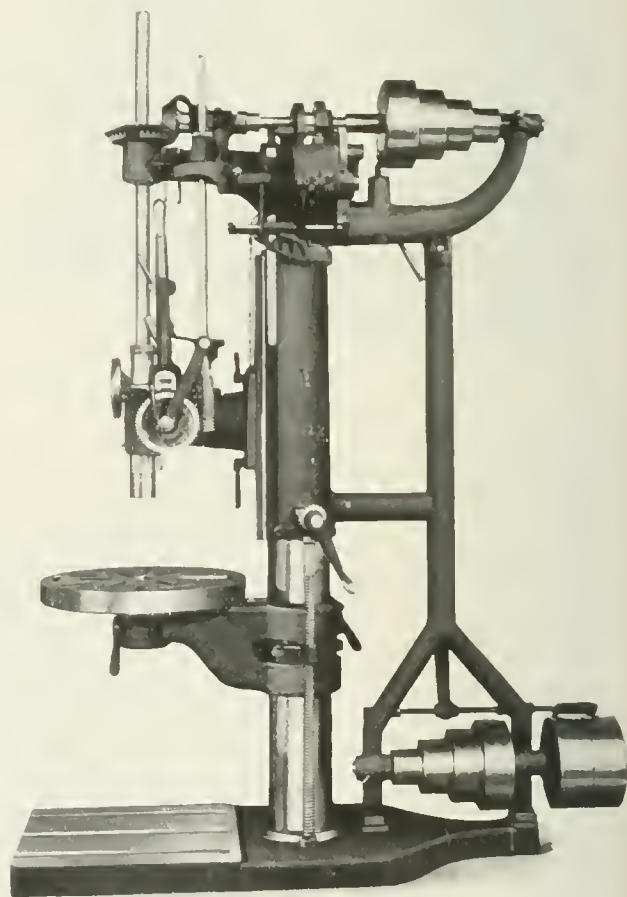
Rockford 26-inch Drilling Machine with Geared Feed
